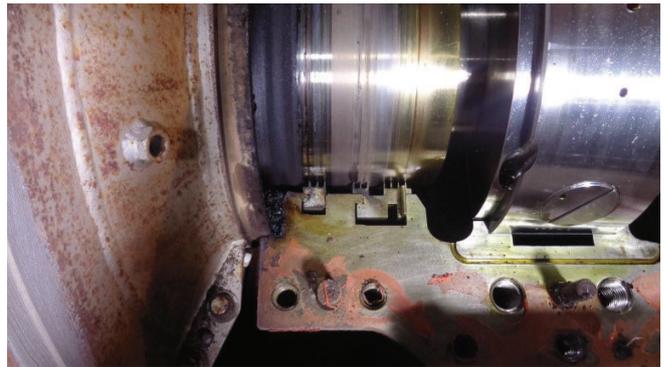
(b) Bearing 1 and rotor with housing top cover removed, showing deposits at forward side labyrinth nearest to 3rd stage wheel.
